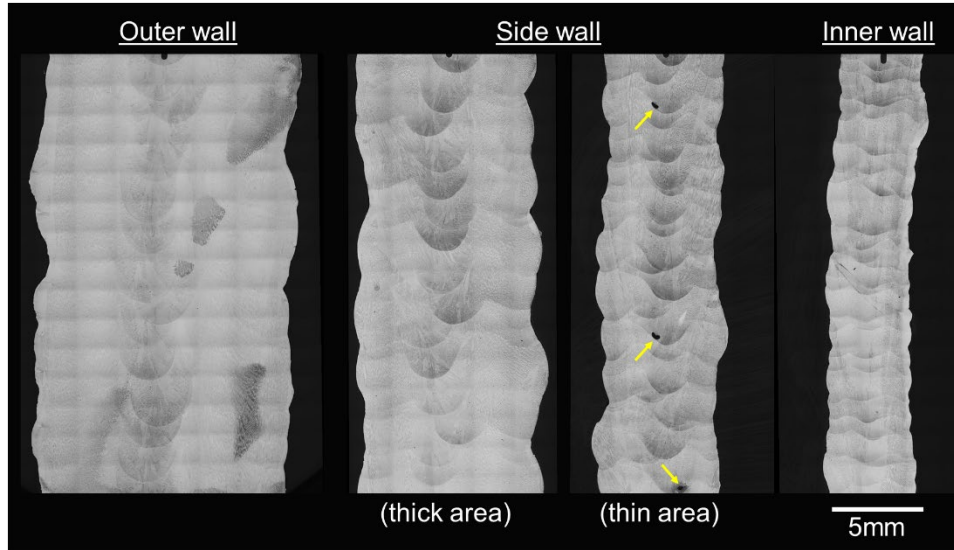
Cross-sectional macrostructure of the as-printed 316LMn demo component
